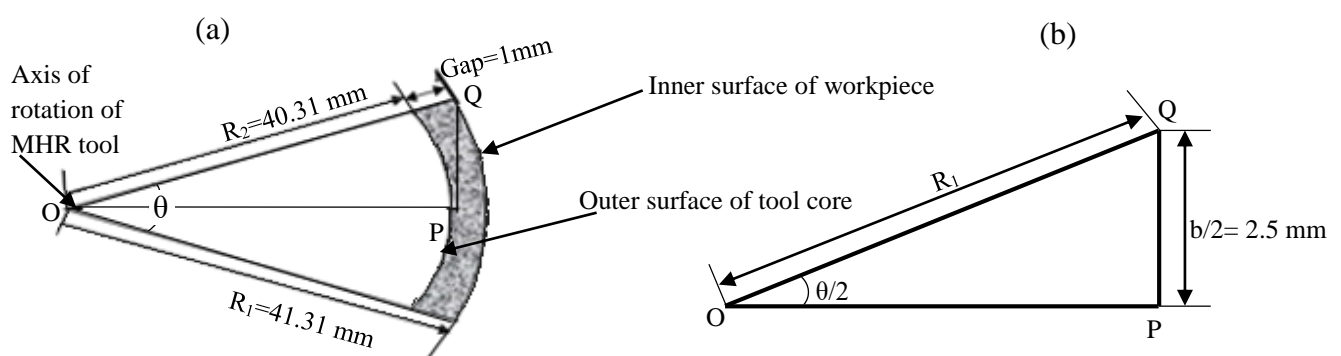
(a) Sector formed by MRP fluid layer in gap between tool core and workpiece surface and (b) right angle triangle formed with half of the sector
